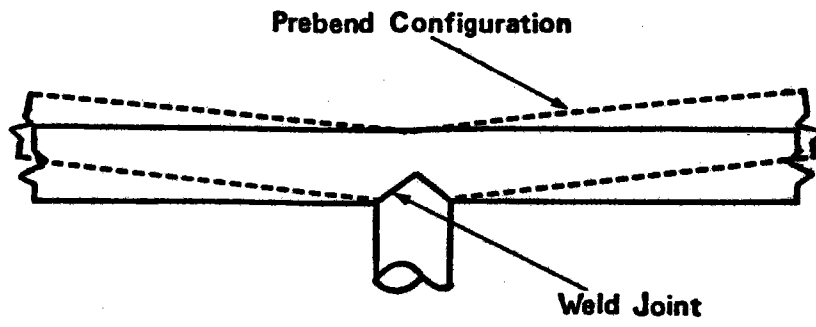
Header-to-Tee Weld Joint Strategy
